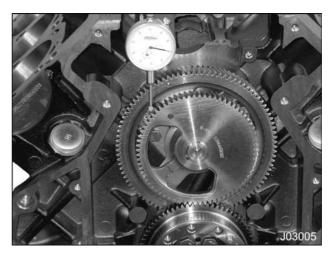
Checking primary balancer gear-to-crankshaft gear backlash
